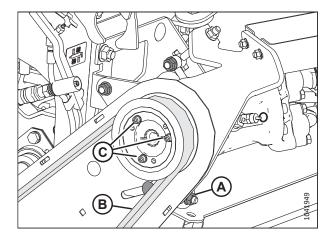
Drive Pulley – Conditioner Drive Motor
